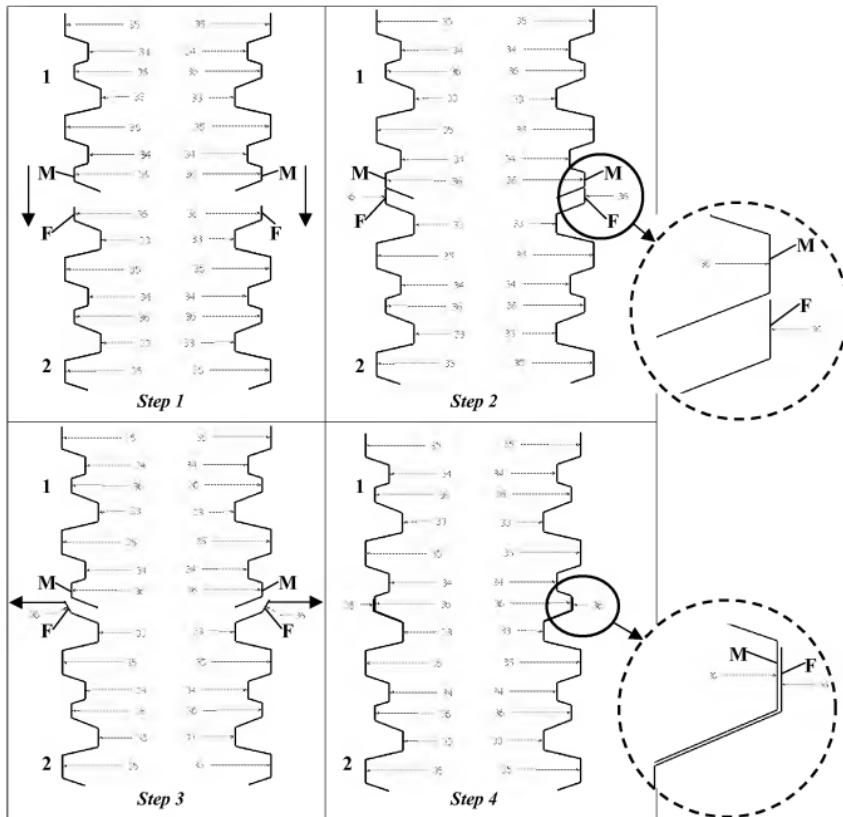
Schematic joining Graves' small joint portion 36 to small joint portion 36
